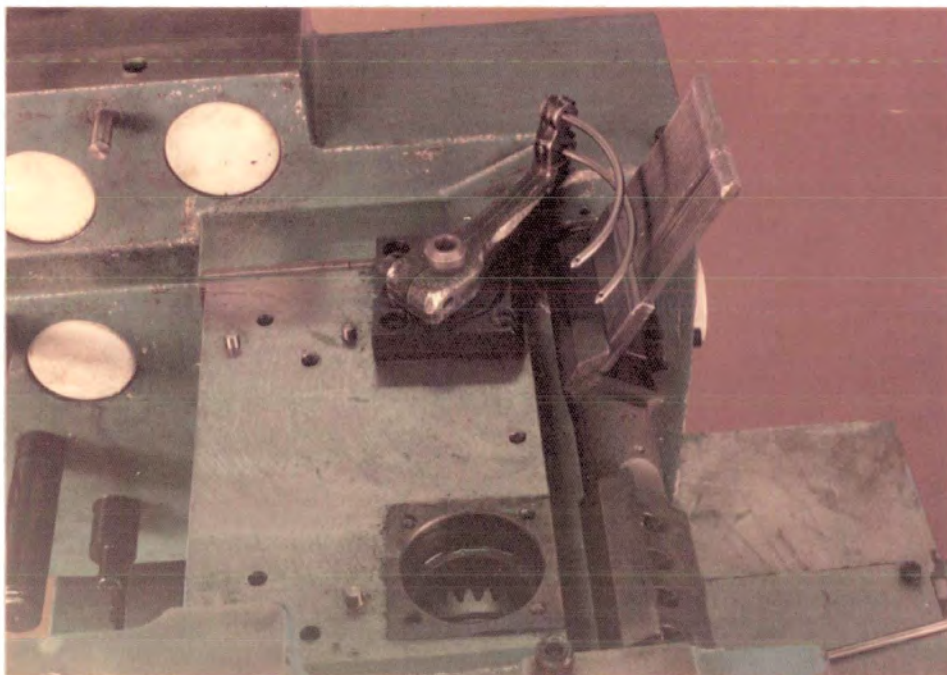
Top view - Mechanism unit box. Bevel gears carried by link O_2 , weft needle arm, shaft O_3 and the reed.
